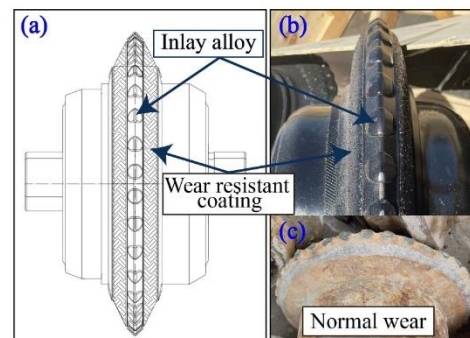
Optimized V-shaped disc cutter: (a) design, (b) cutter photographs, and (c) cutter after tunneling
